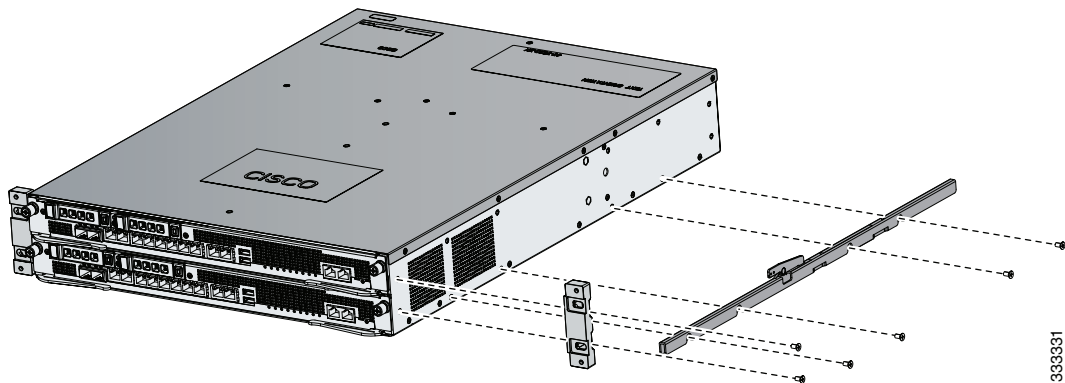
shows all of the brackets that can be removed for the fixed rack mount.
